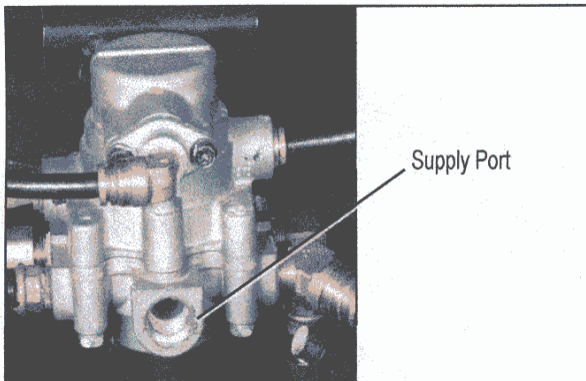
EXTERNAL CHECK VALVE REMOVED
